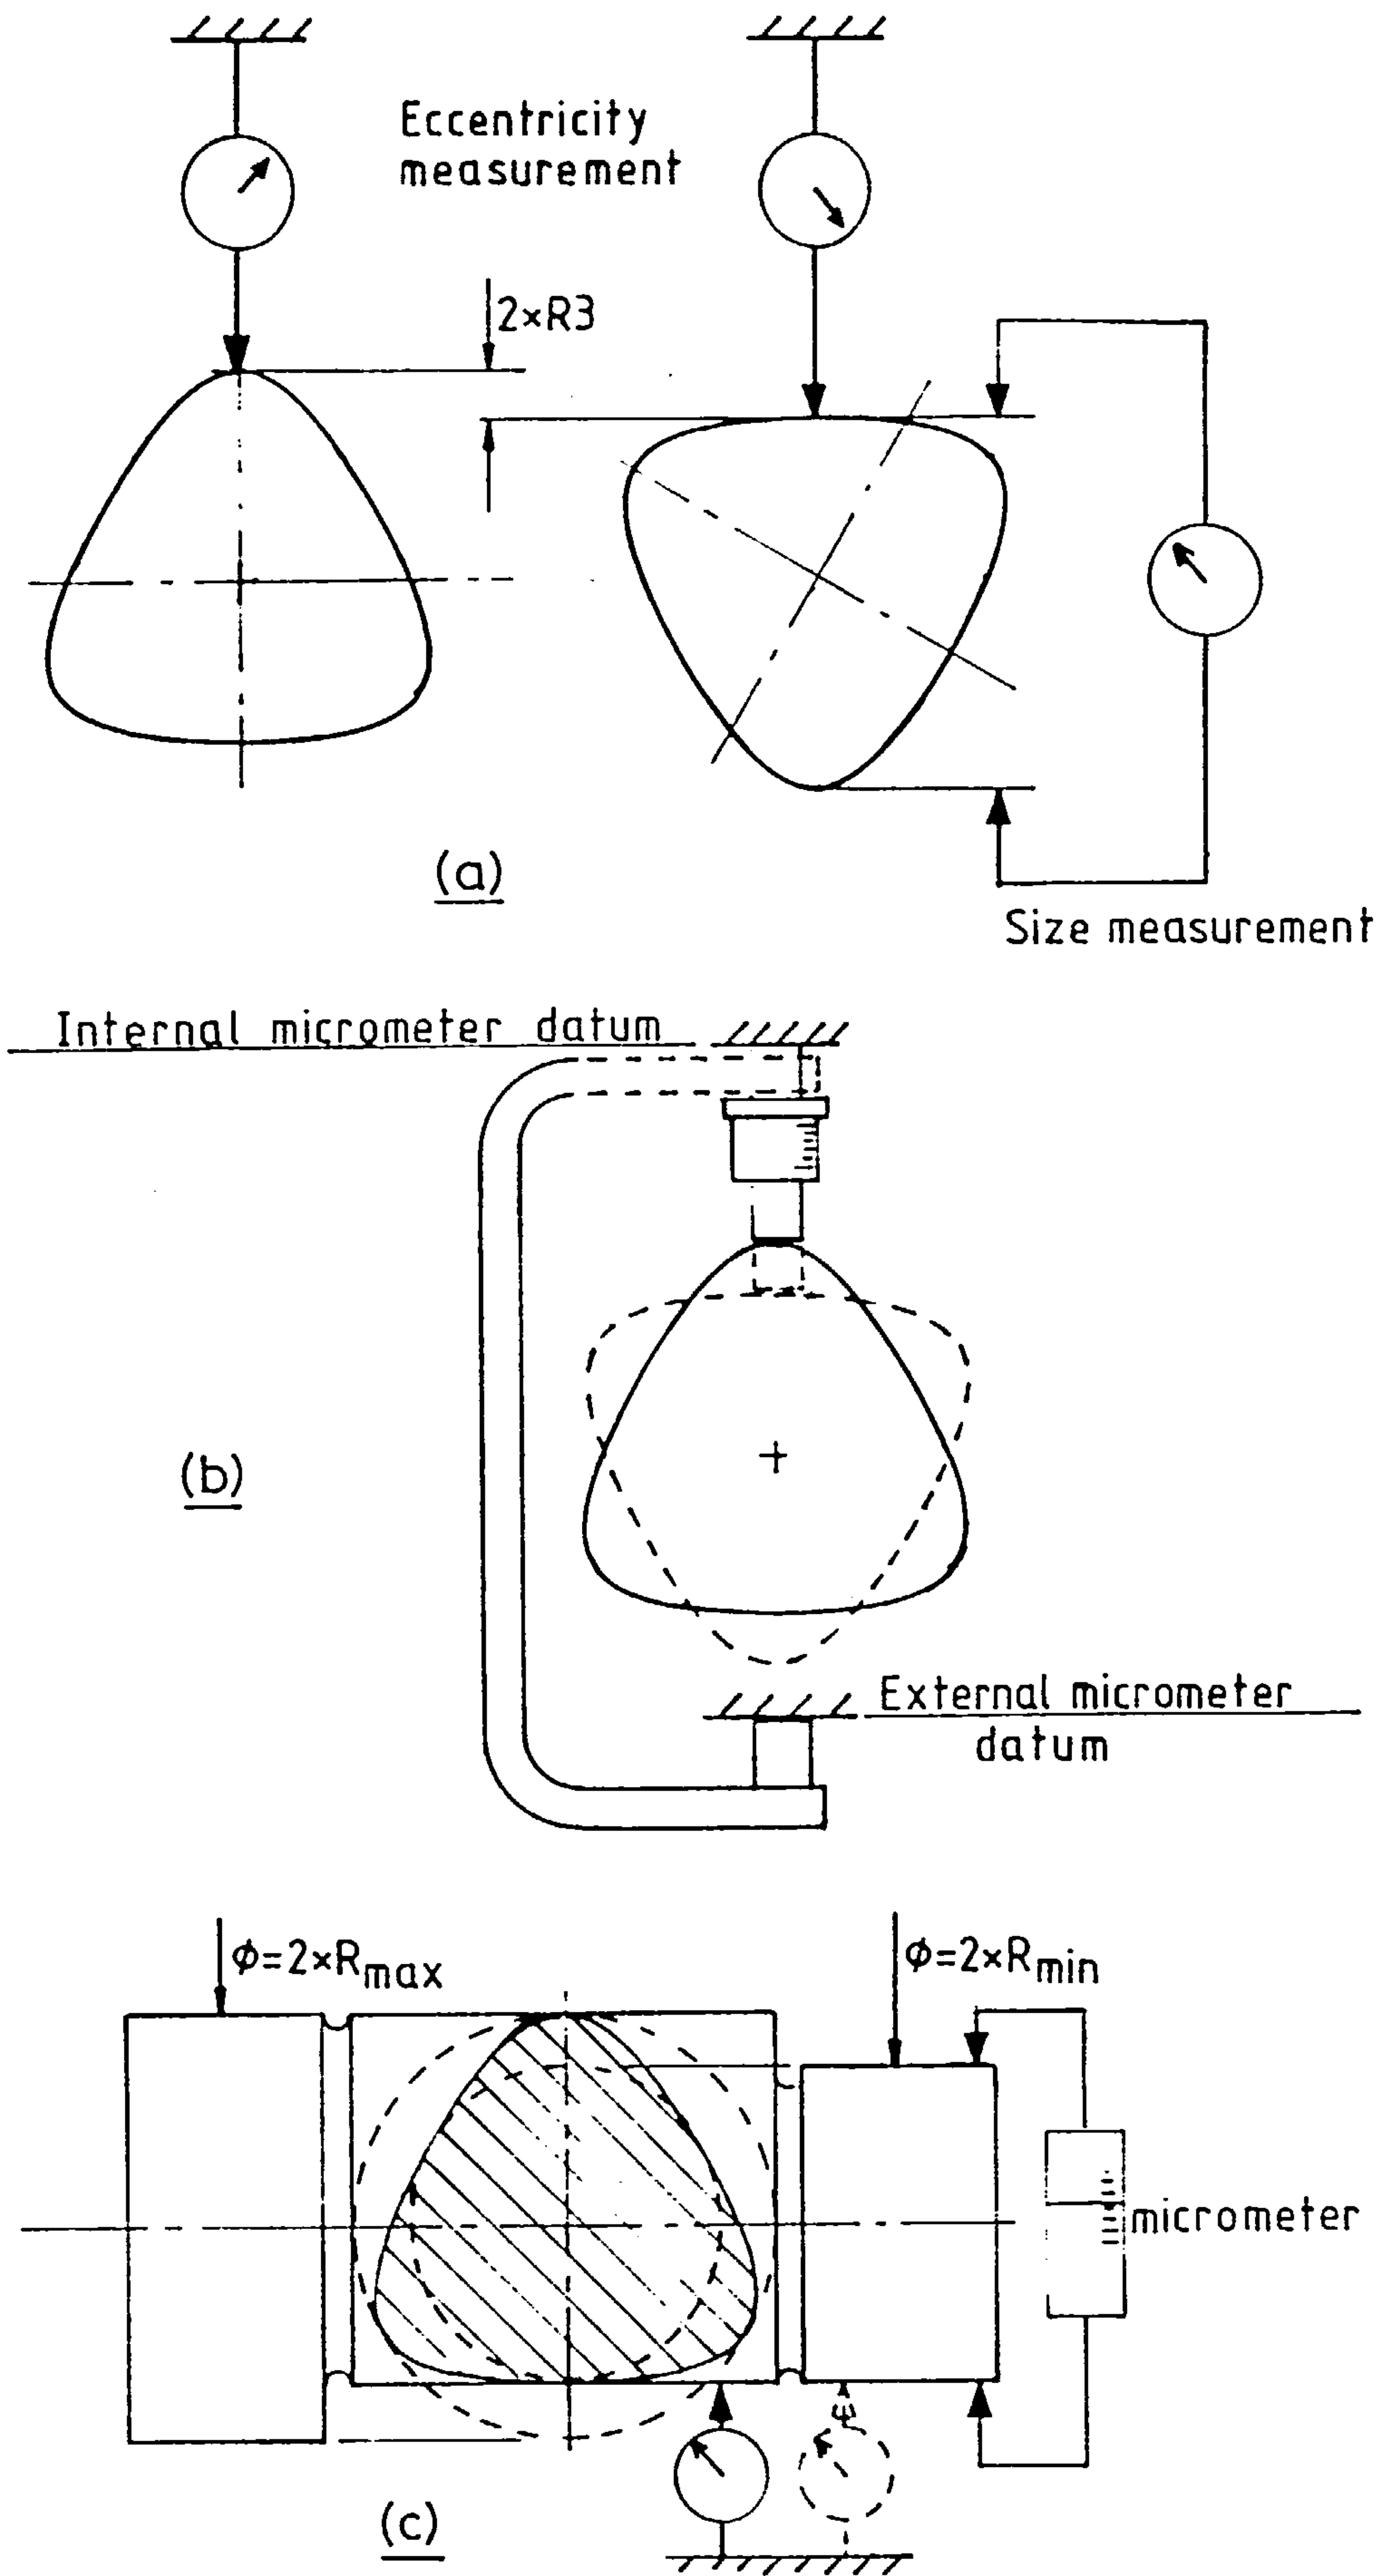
Measurement of specimen profiles for setting purposes.
